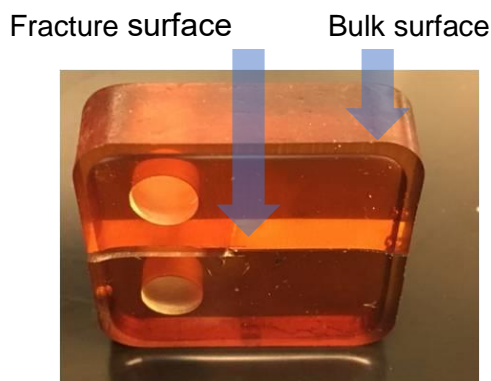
Demonstration of a completely fractured compact tension (CT) specimen.
